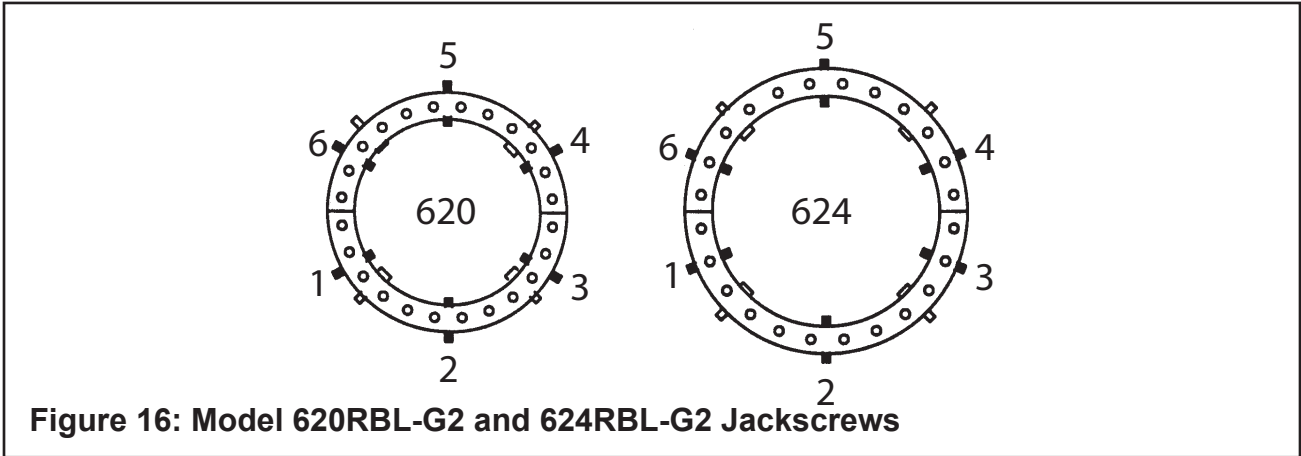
Model 620RBL-G2 and 624RBL-G2 Jackscrews
